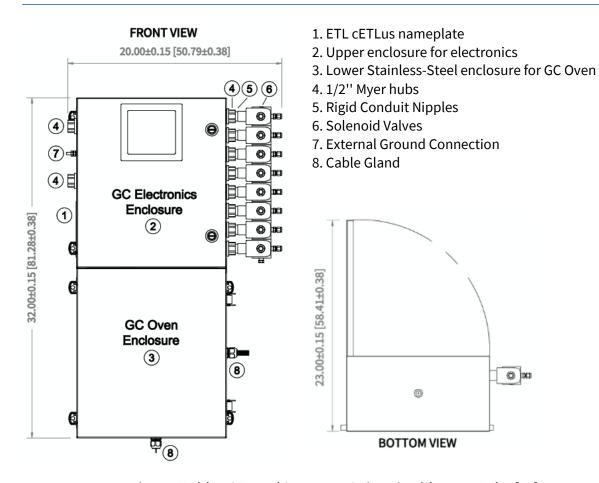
Model 132S External Components & Dimensions/Clearances Inches [cm]
